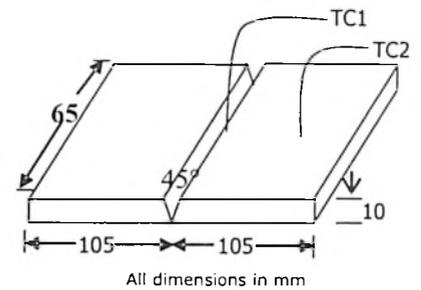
Schematic sketch of weld plates instrumented with thermocouples
